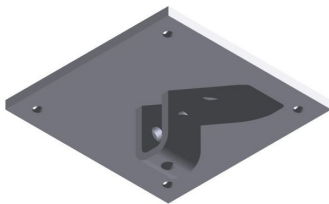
CONCRETE ATTACHMENT PLATE W / BEAM BRACKET
